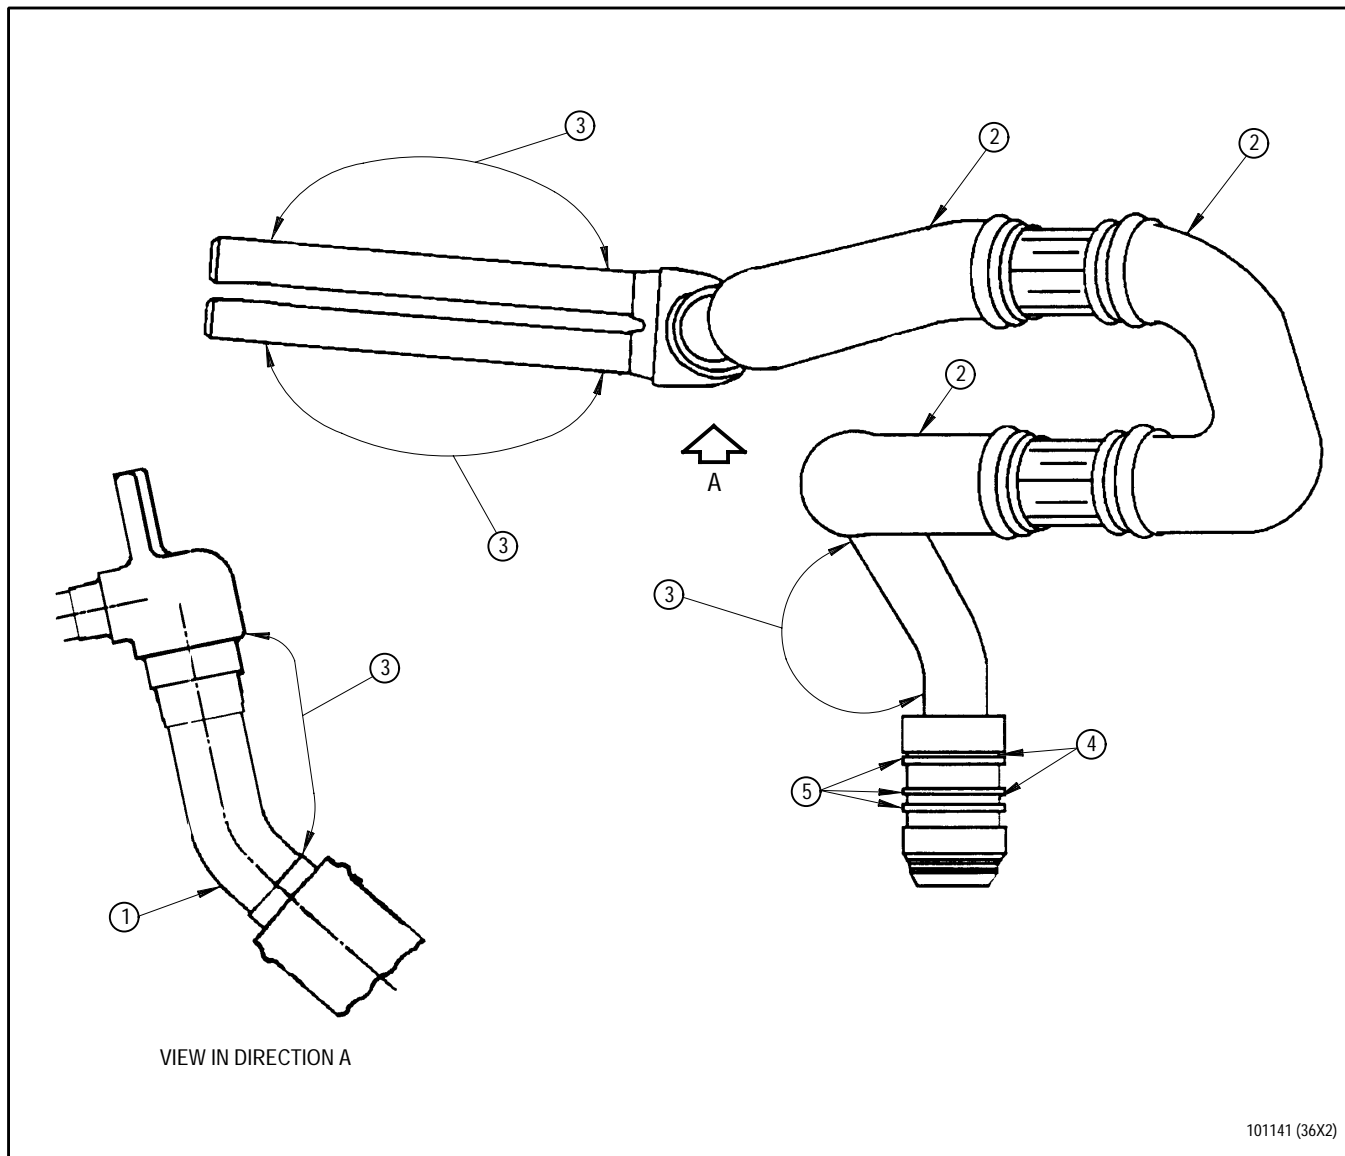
No. 4 Bearing Left Internal Scavenge Tube Assembly - Inspection
